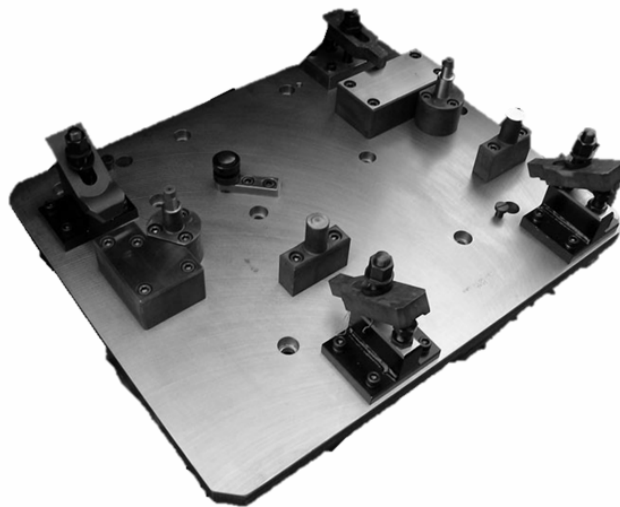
A CNC fixture (source: Taylor Design Engineering)
